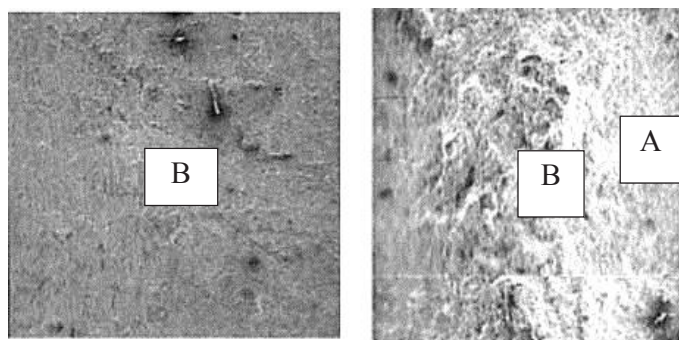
Fractographs of fractures of alloy AMg6 obtained in relation to specimen fractures, where zone A – processed area near the metal surface, zone B – central part of the fracture: a) without EDT; b) after EDT (mag. 33x)
